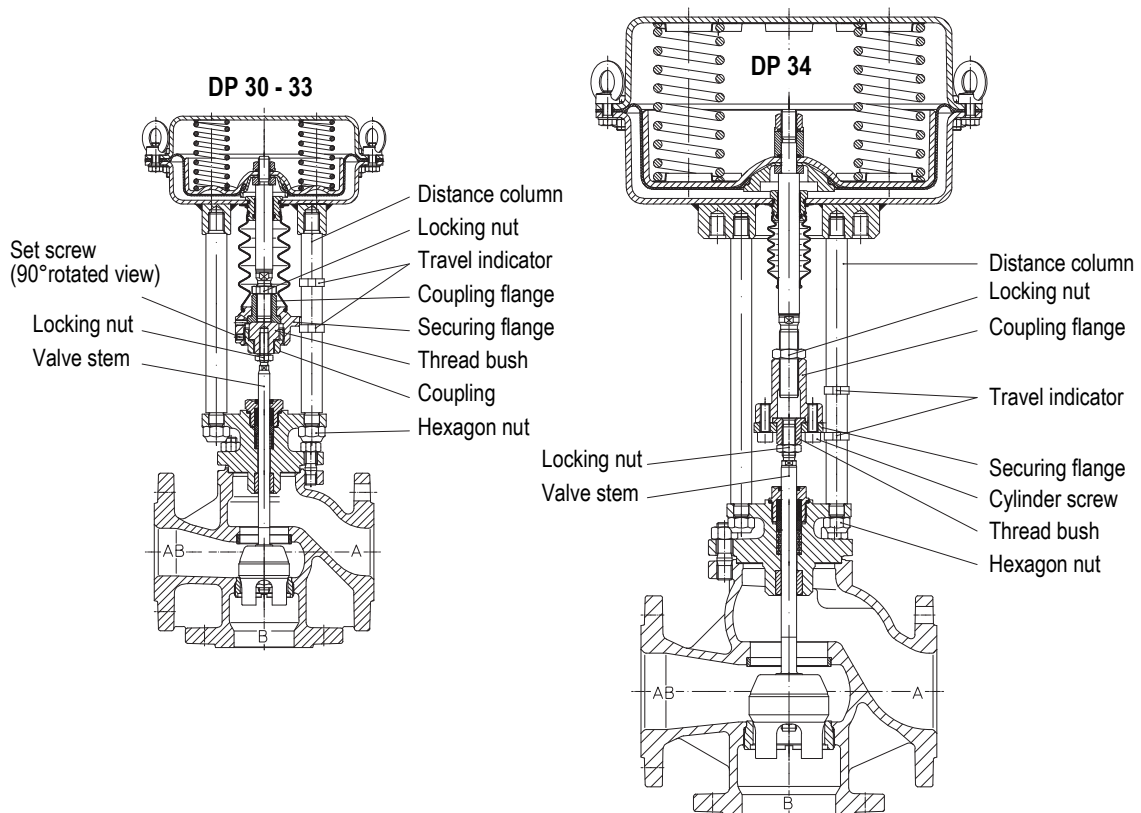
Pneumatic three-way control valve as a mixing valve (path AB-B)
